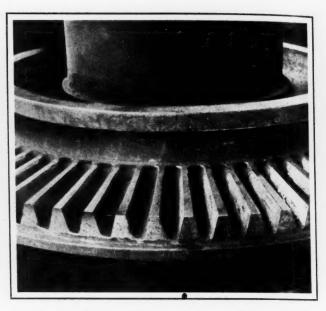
Gear Shown in Fig. 1 after Having Been Completely Rebuilt by Welding on Metal and Grinding to Size
